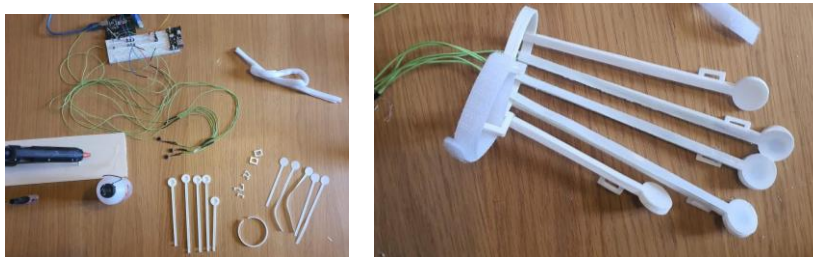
(a) Set up for physical assembly (b) Final assembly of the haptic glove.
